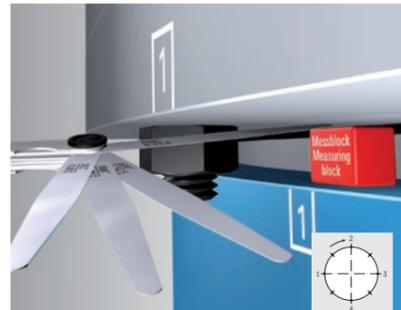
Basic setup for measuring the axial reduction with a feeler gauge
